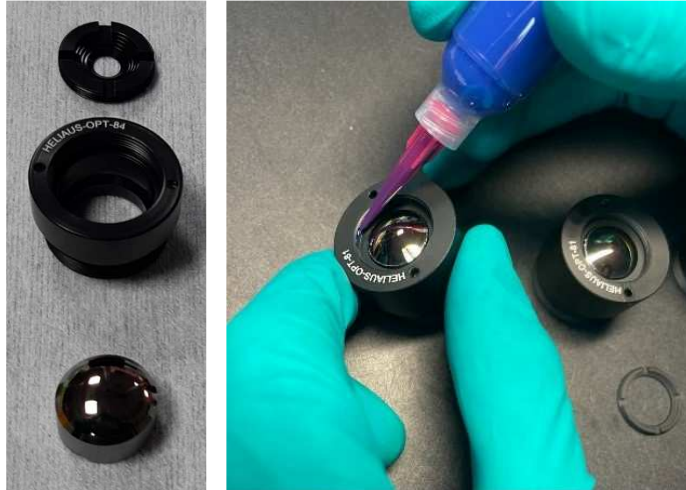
Assembly of lenses. Left: pieces to assemble for lens HELIAUS-OPT-84. Right: final assembly of lens HELIAUS-OPT-82.
